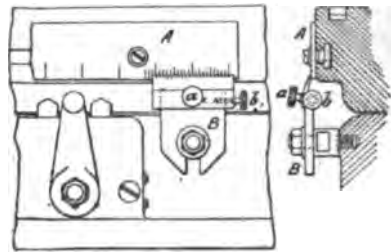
Vernier applied to Table of B. & S. Machines.
